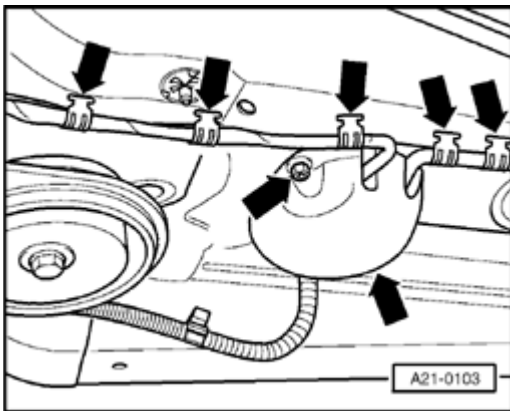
Removing Cover For Both Heated Oxygen Sensor (Ho2S) Connectors And Pull Electrical Wire With Retaining Clips From Heat Shield
